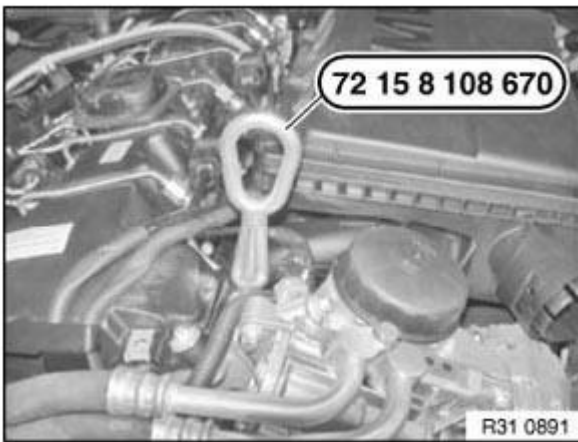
Identifying Towing Hook (72 15 8 108 670)
